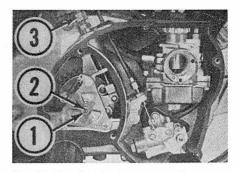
Clutch should be adjusted at (1) as described in text. Cable quide (3) adjusts the handle free play.
